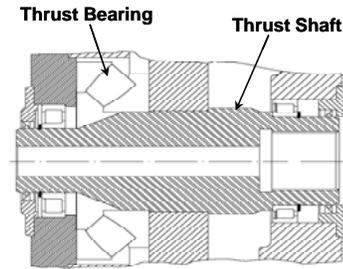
Typical Gearbox and Thrust Bearing assembly.
